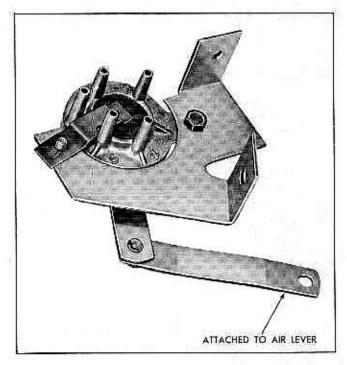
Vacuum Switch for Direct-Aire Heater when used with Circ-L-Aire Conditioning
